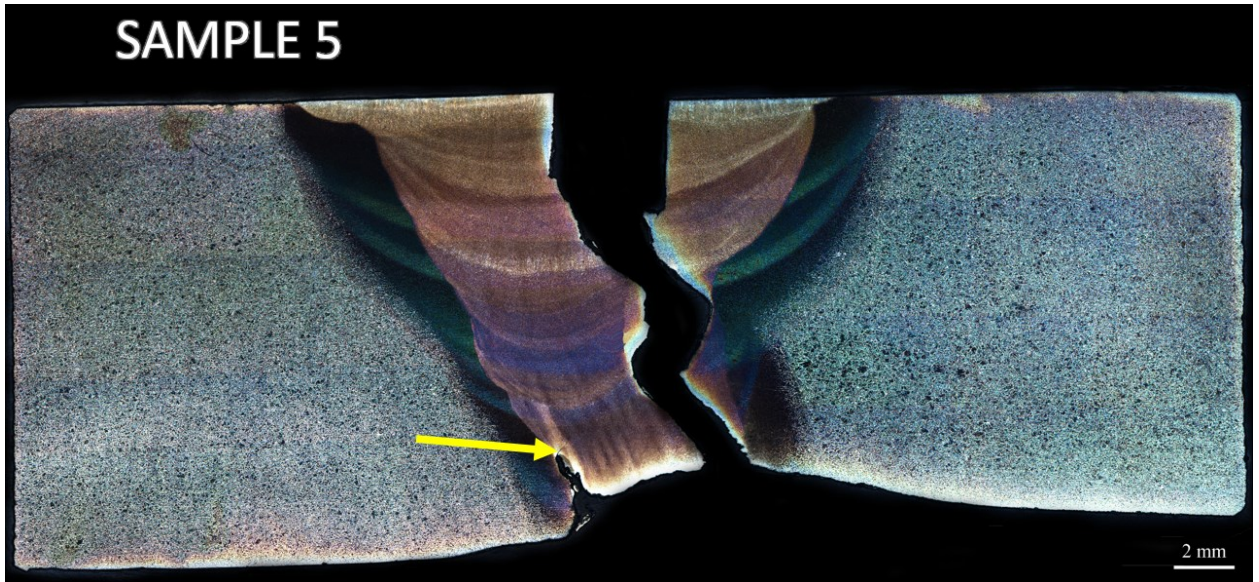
Photo of sample 5 showing through fracture with crack path through weld metal, with another potential crack also from root pass on the left-hand side in HAZ (yellow arrow).
